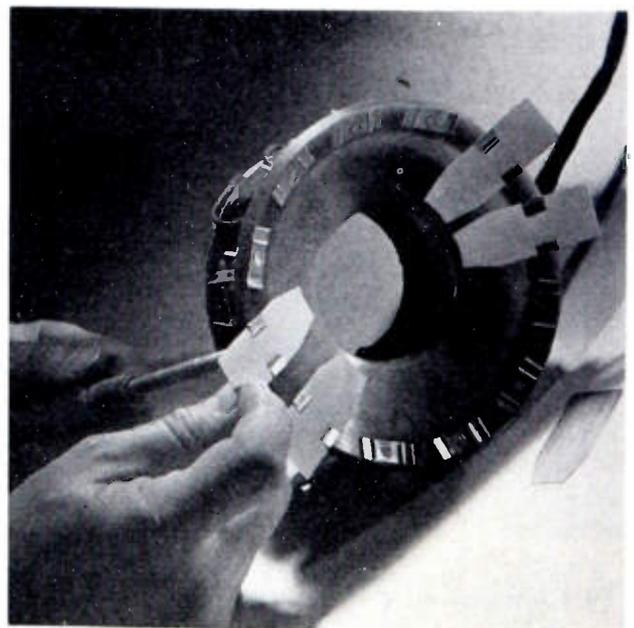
Front view of 65° multi-beam deflection yoke adapted for machine winding and die forming. 4 compensating tabs are shown in place on moulded polyethylene mounting cover.
